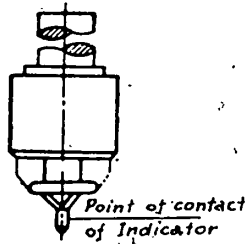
Schematic Diagram for Checking a Countersink with a Wobble Indicator
